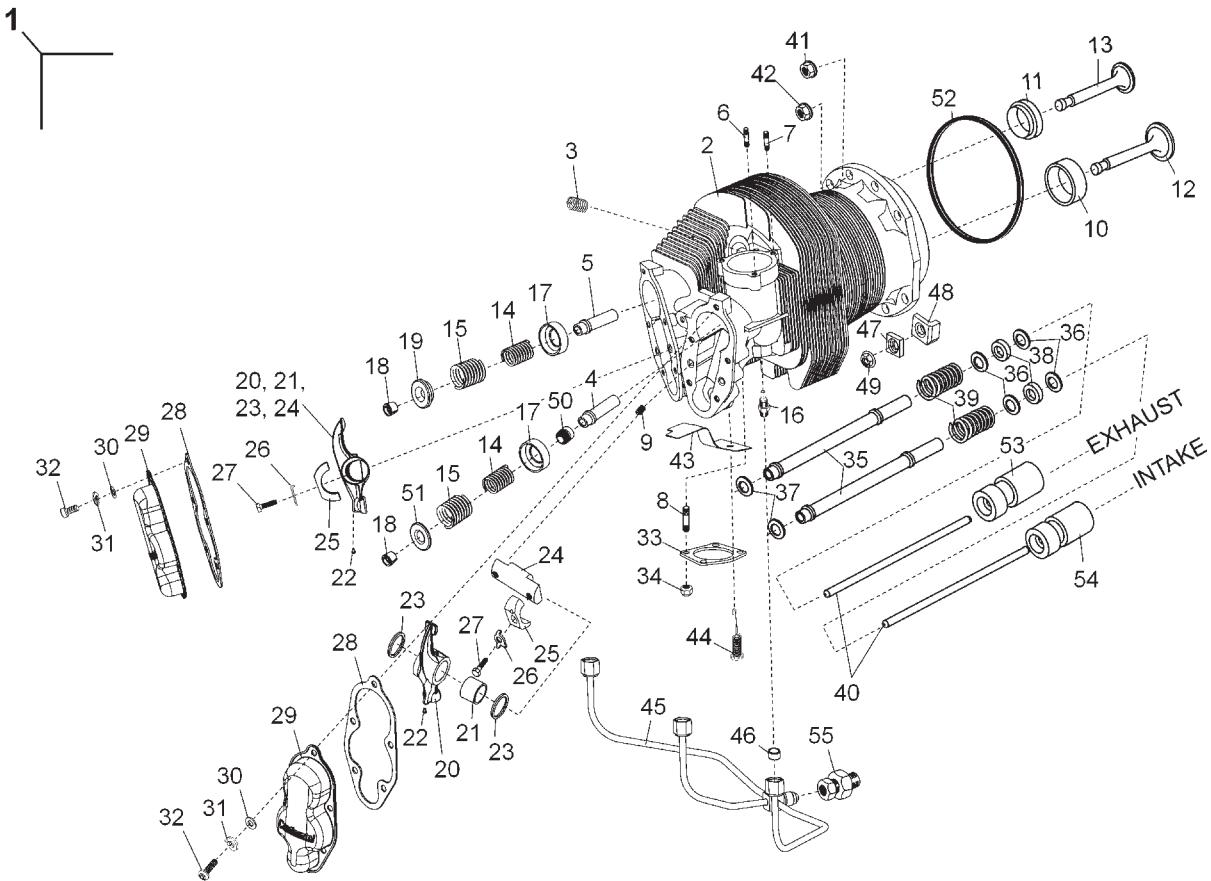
IO-550-G, N, P & R Cylinder Assembly G N P R
